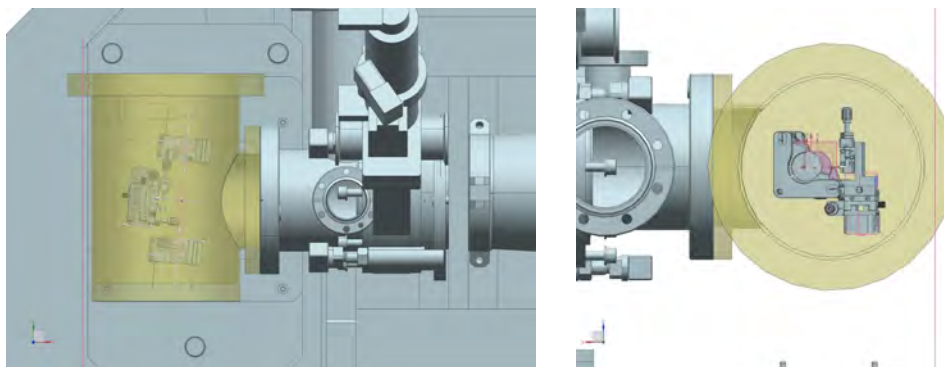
Draft CAD design of the on-beam KWISP vacuum chamber (INFN Trieste)
